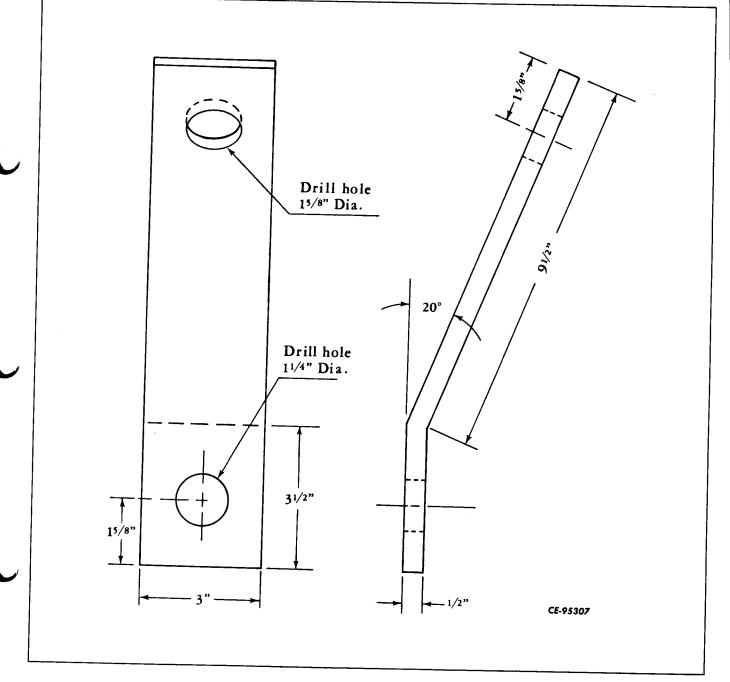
Item V. Slide-Stand Weldment (Left Hand).
